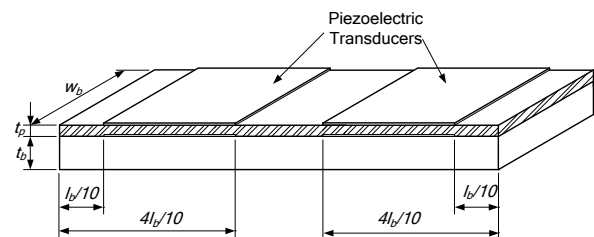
Layout design of the piezoelectric transducers on a suspension beam
